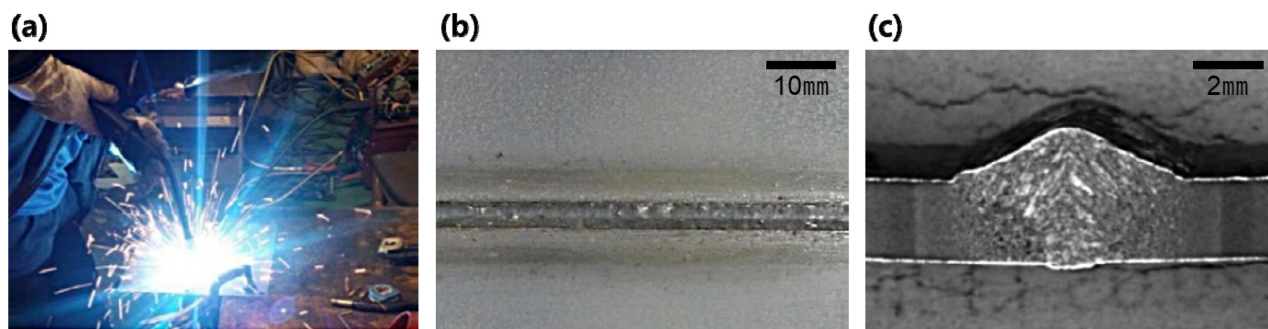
Arc welding evaluation of PosMAC® Super (a) welding procedure, (b) weld bead appearance, and (c) weld bead cross section
